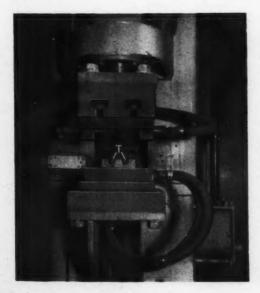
This unusual arrangement of electrodes on an A.E.I. welding machine is employed for producing the two spot-welds that secure each endfitting. Each semicircular recess serves to locate one end of the work
